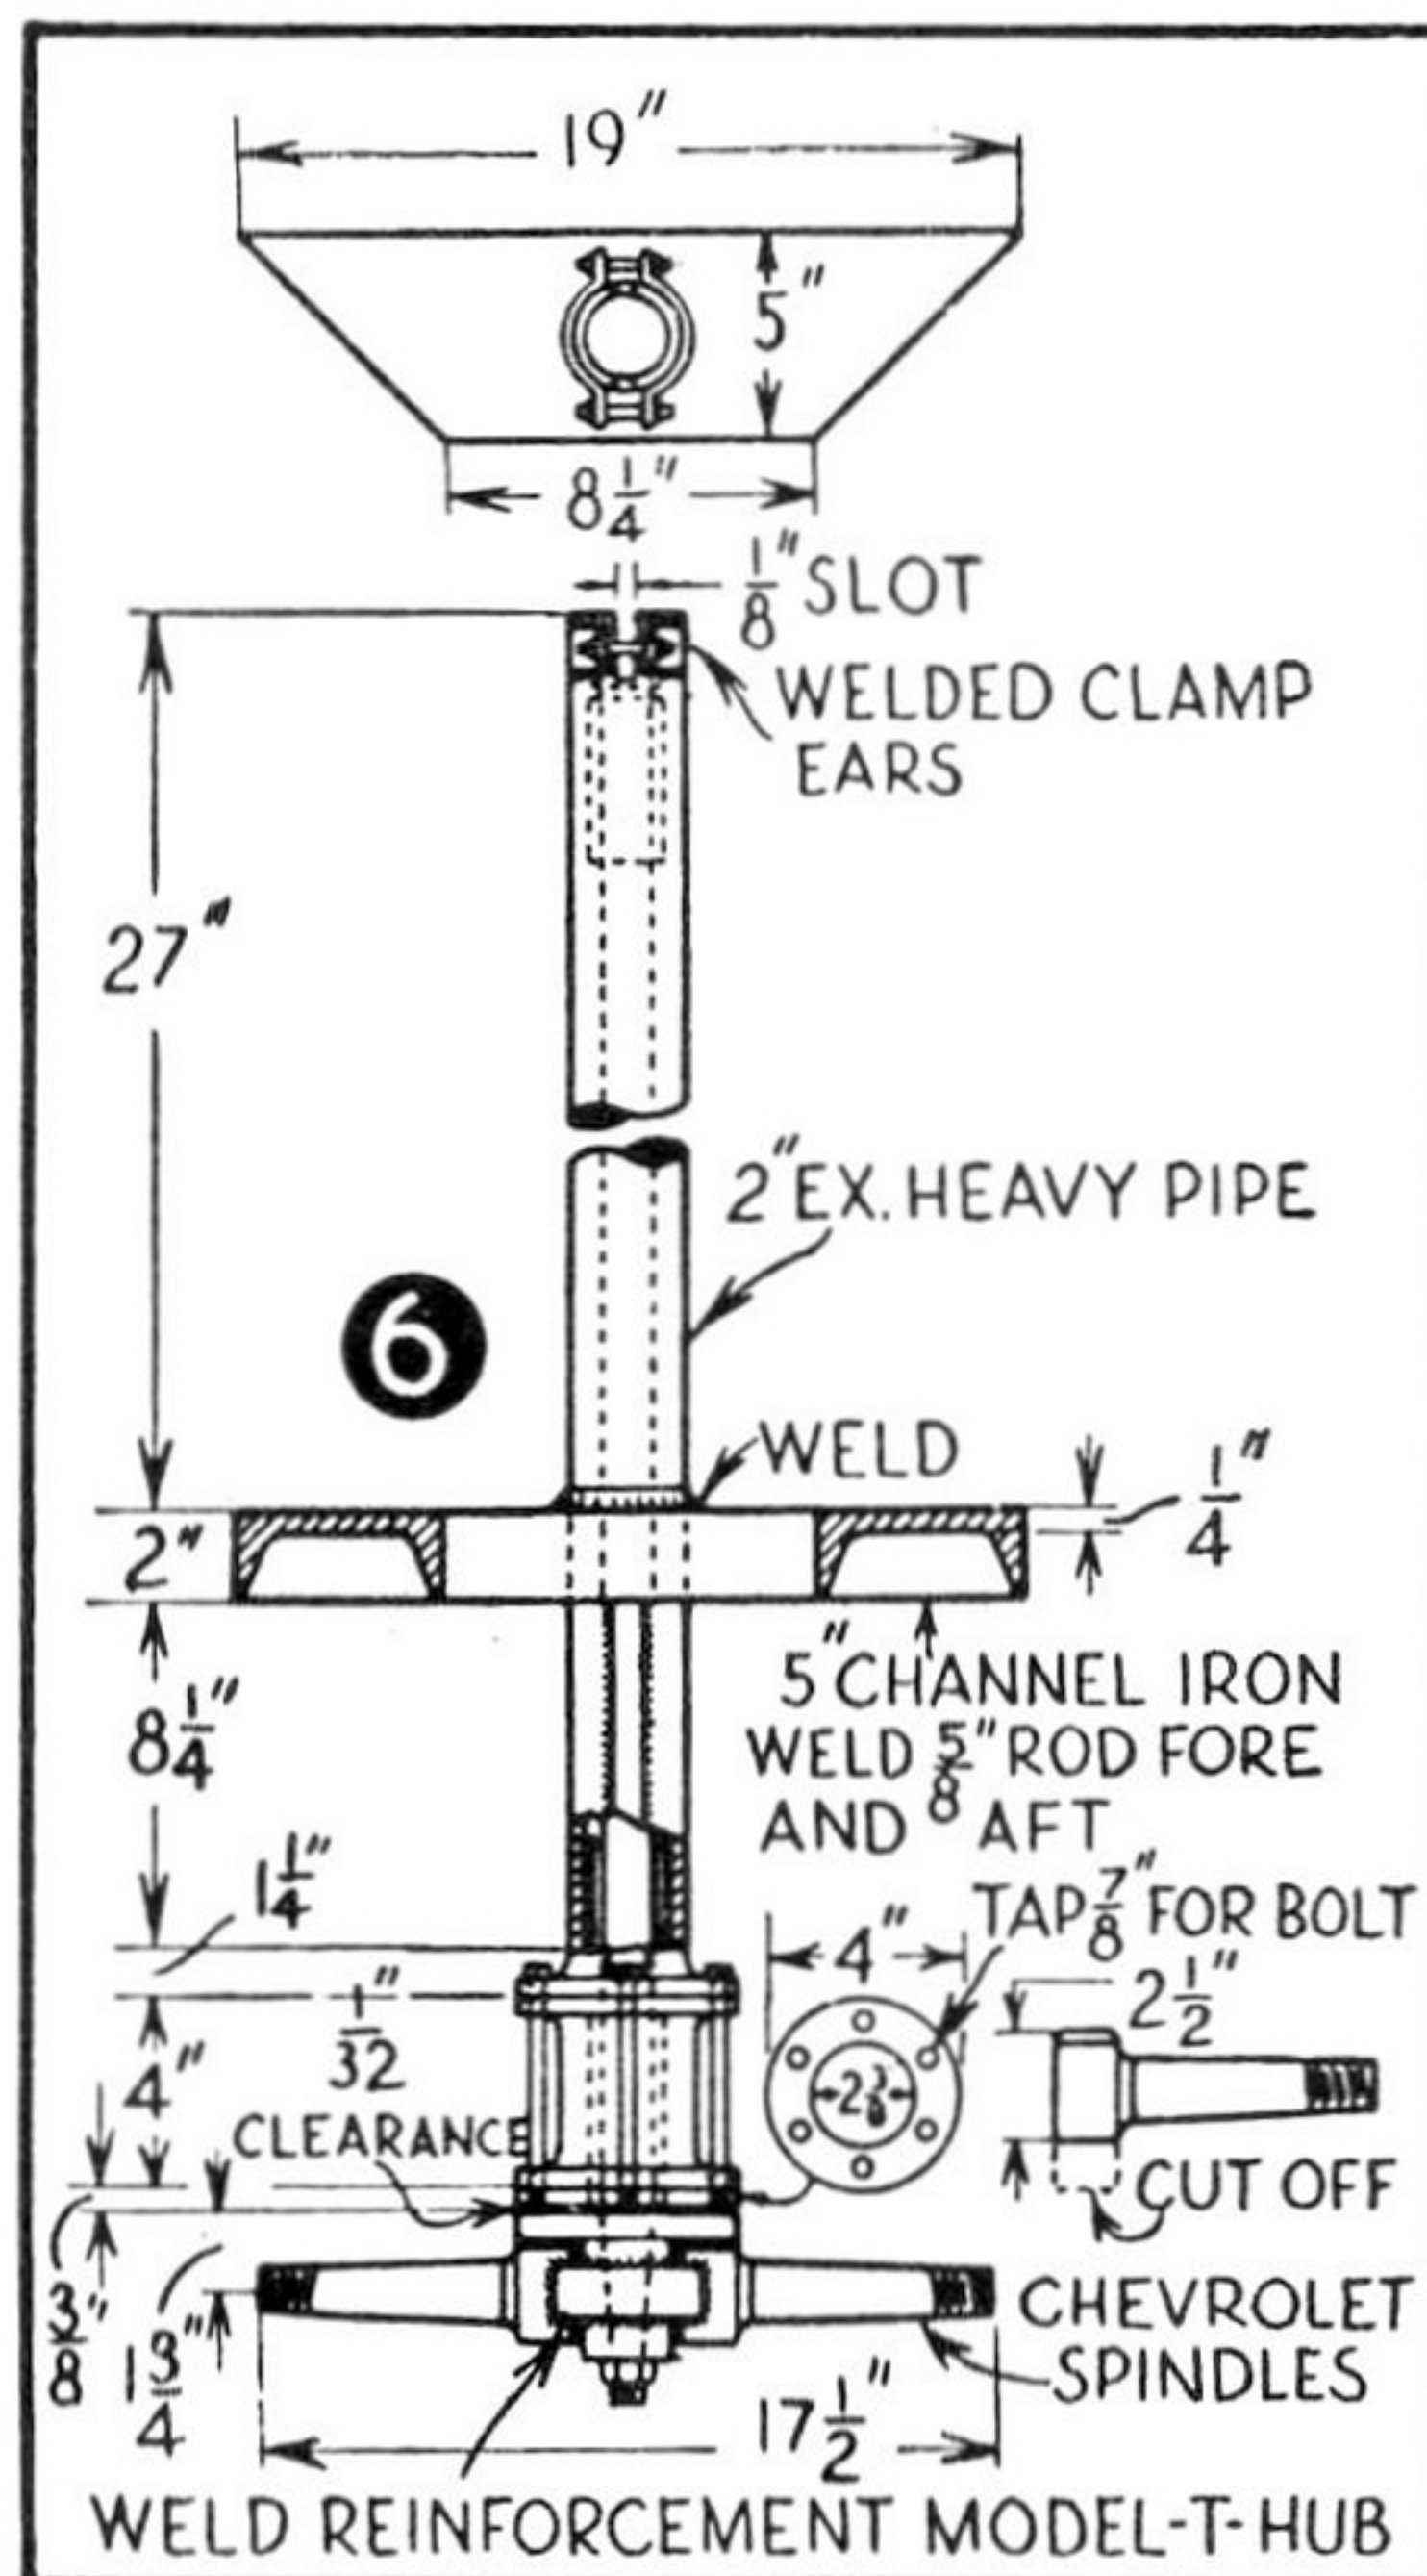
Assembly drawing of steering system welded in place in channel iron crosspiece.
